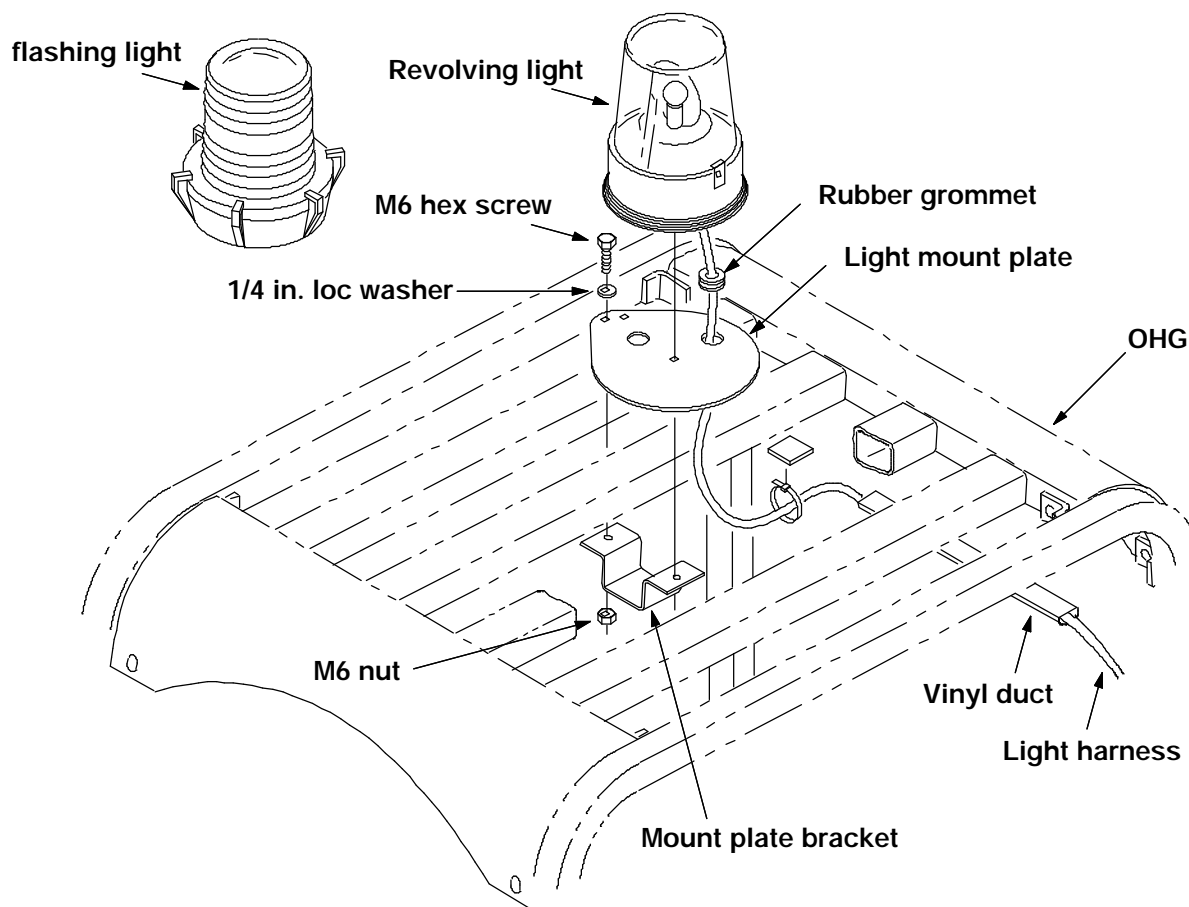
OHG Mounted Rev/flashing Light Assembly
